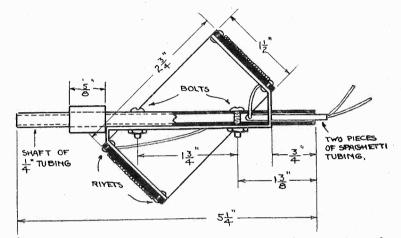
Diagram showing the manner of fastening the coil on the standard. The shaft, which is hollow, is then bolted or soldered to the Z-shaped piece. This makes a solid looking and working rotor for the Ultimate Coupler.
